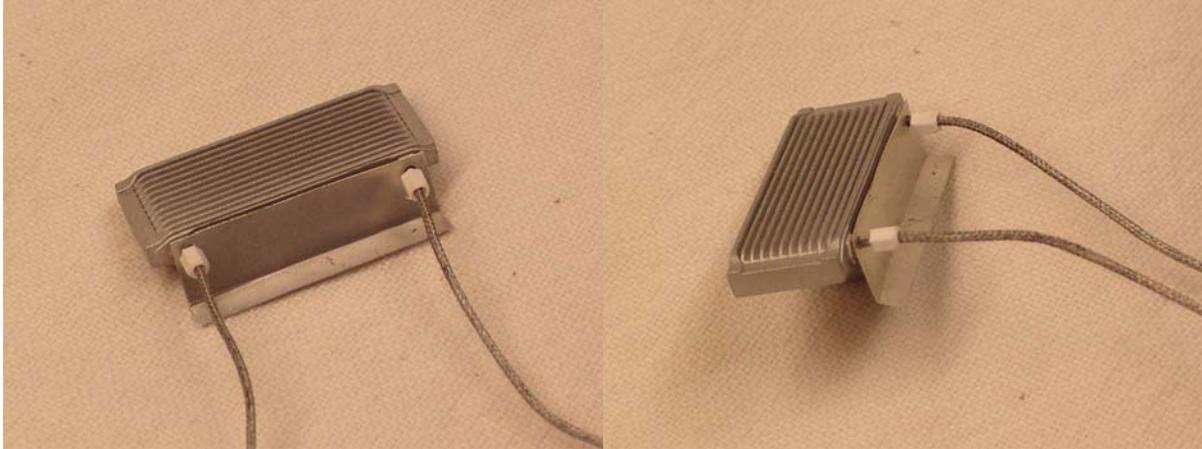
Oil cooler with aluminum pop can mounting bracket and hex rod fittings
